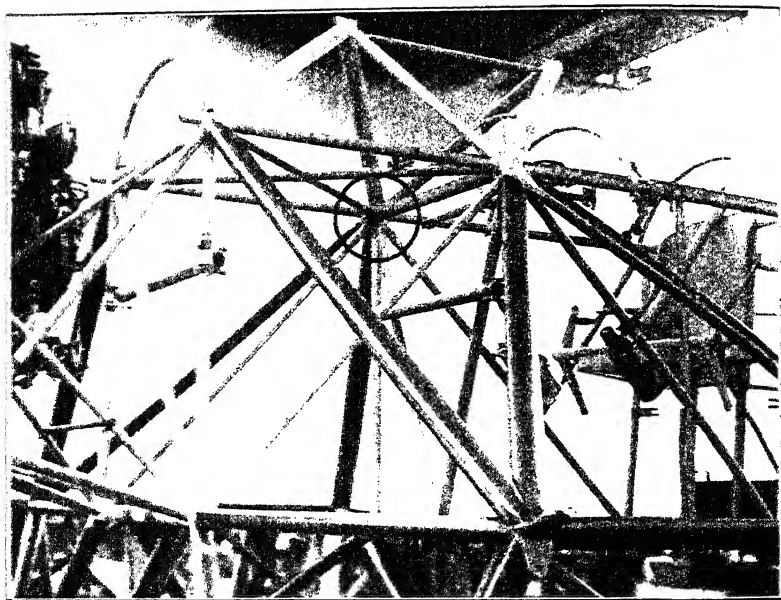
WELDED STEEL TUBE FUSELAGE, FOKKER C VIII-W
